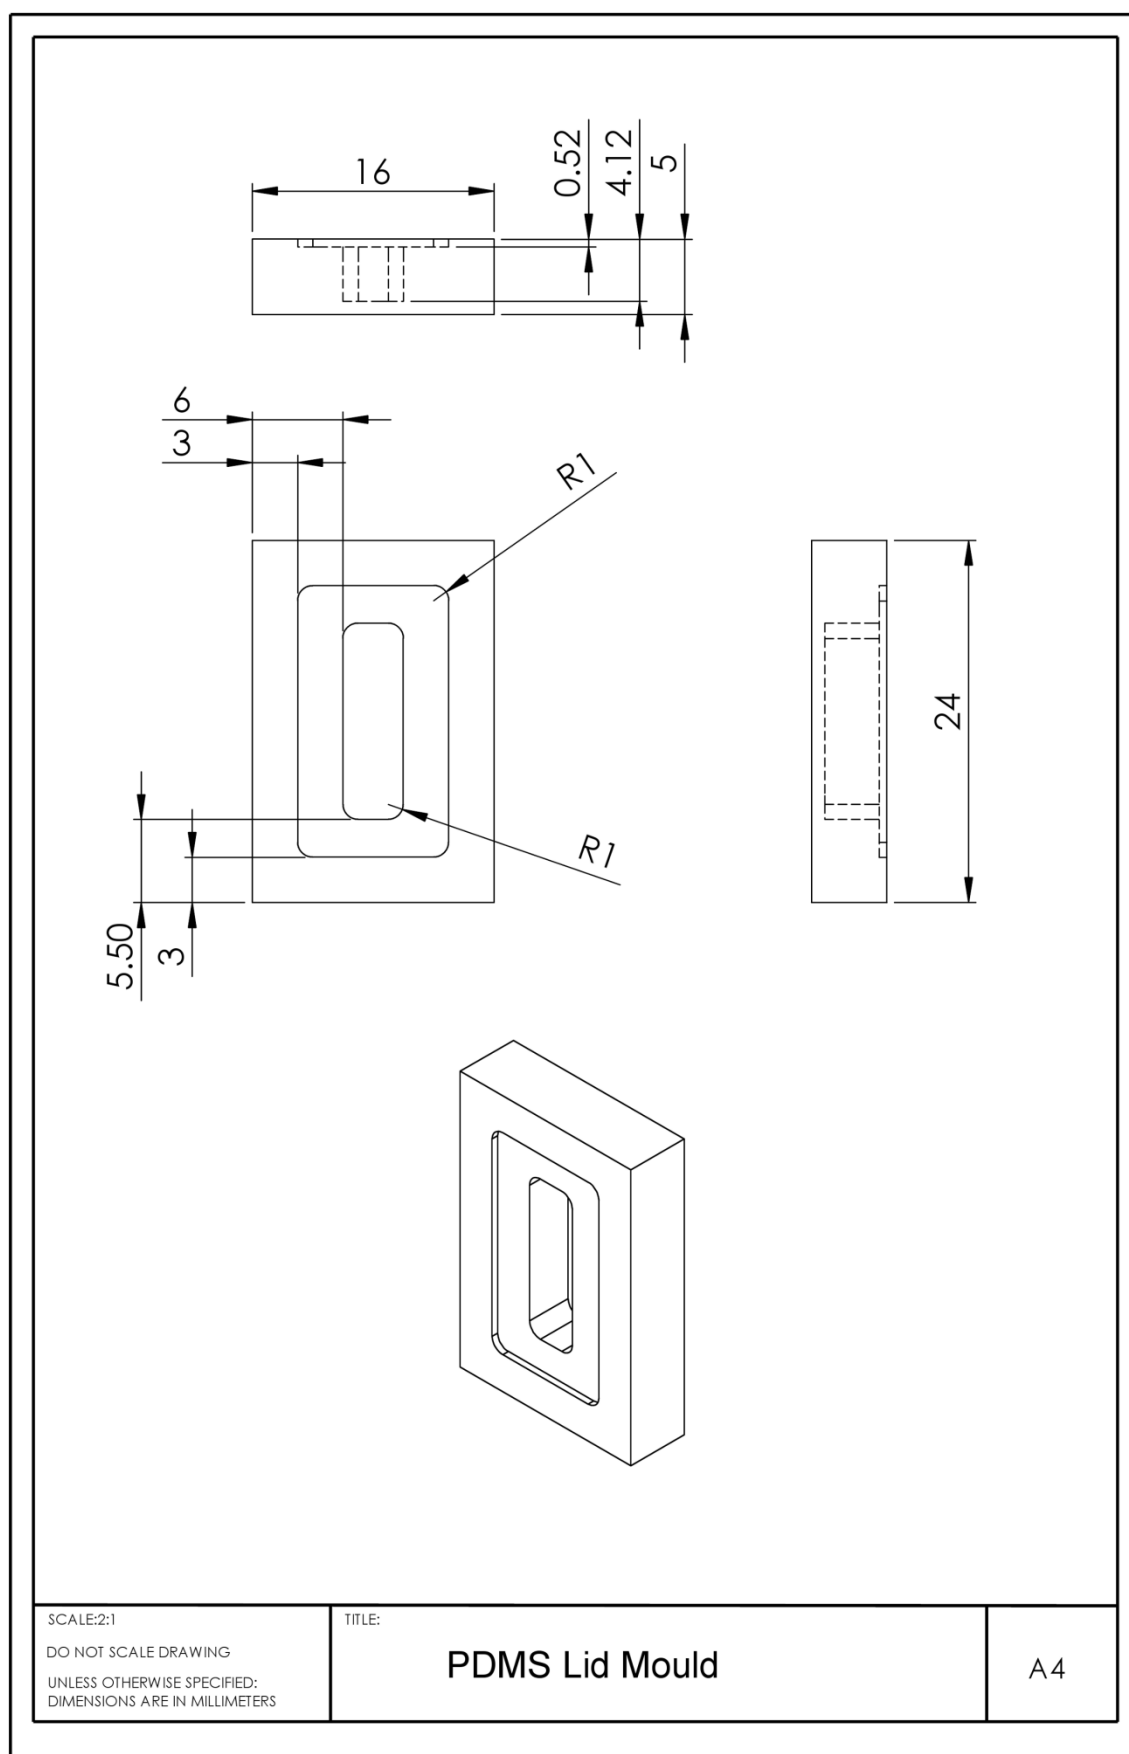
Technical drawing of mould for PDMS lid component.
